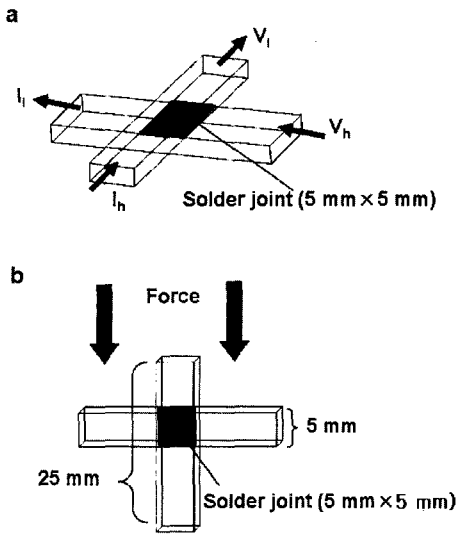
Schematic view of a solder joint made of two Si coupons for (a) electrical and (b) mechanical evaluation.
